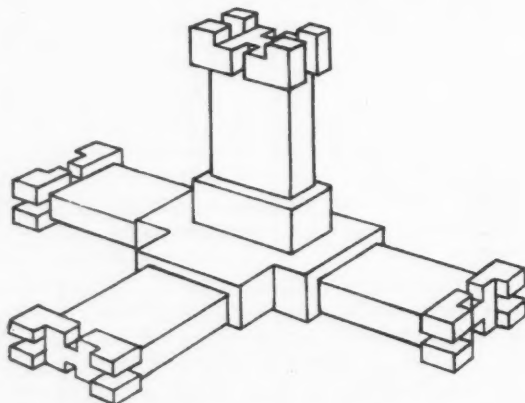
Moulded former with faces relieved prior to the second charge of wax
